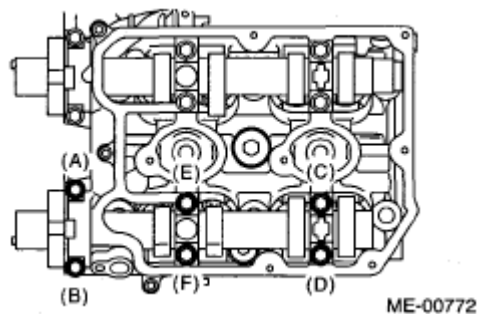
Identifying Exhaust Camshaft Cap Bolts
